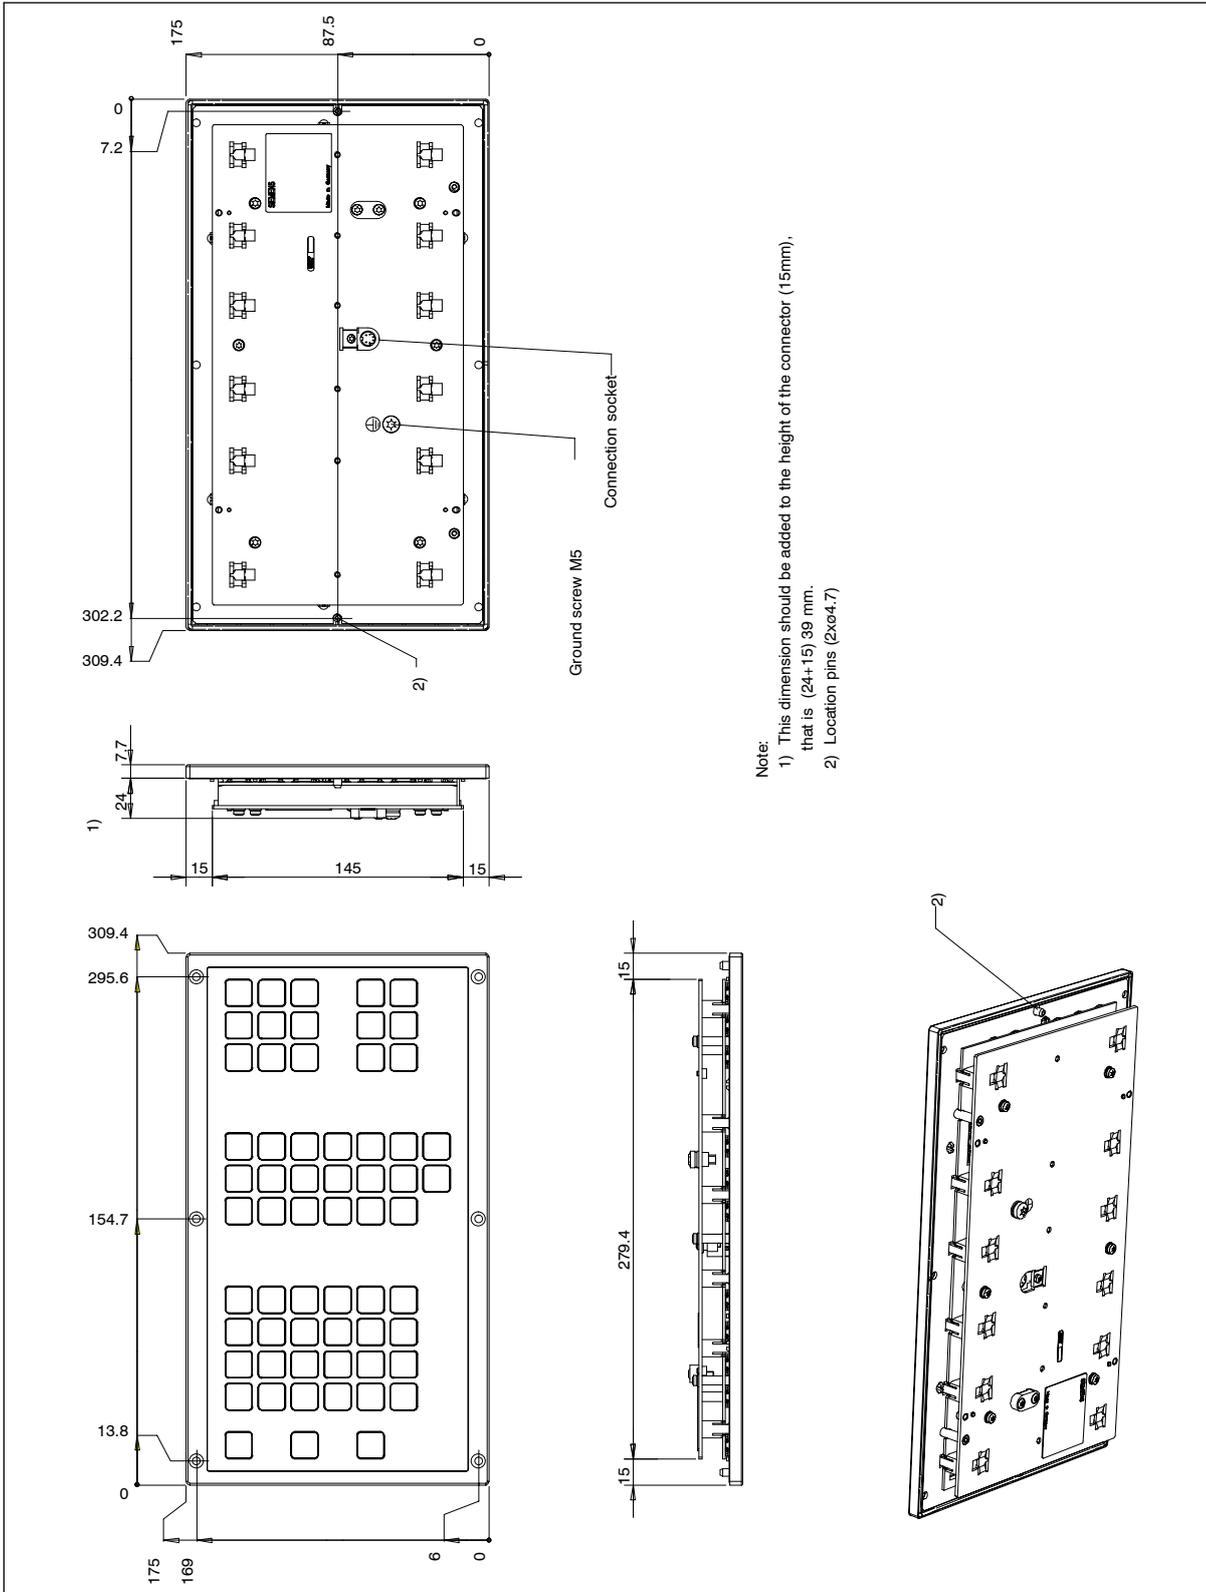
Mounting dimensions for the keyboard (horizontal layout for installation beneath the PCU)
